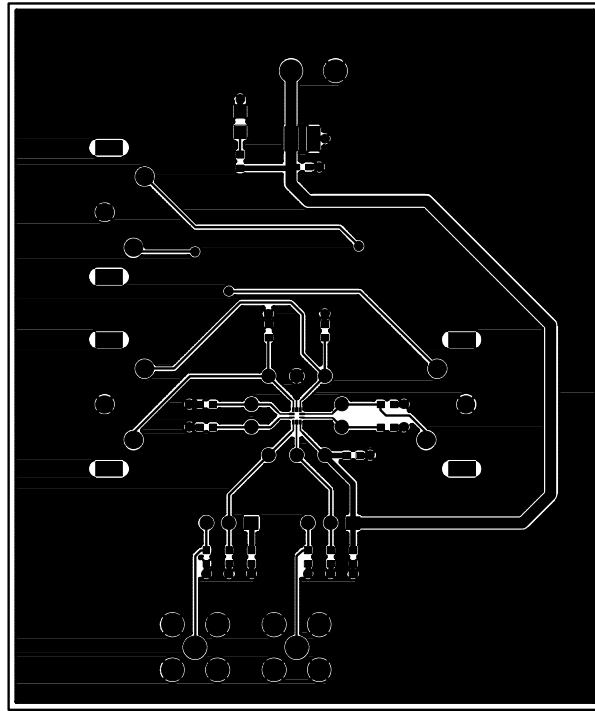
PCB Drawing Layer 1 (Top Layer of the [EVAL-ADG854EBZ](#) Evaluation Board)
